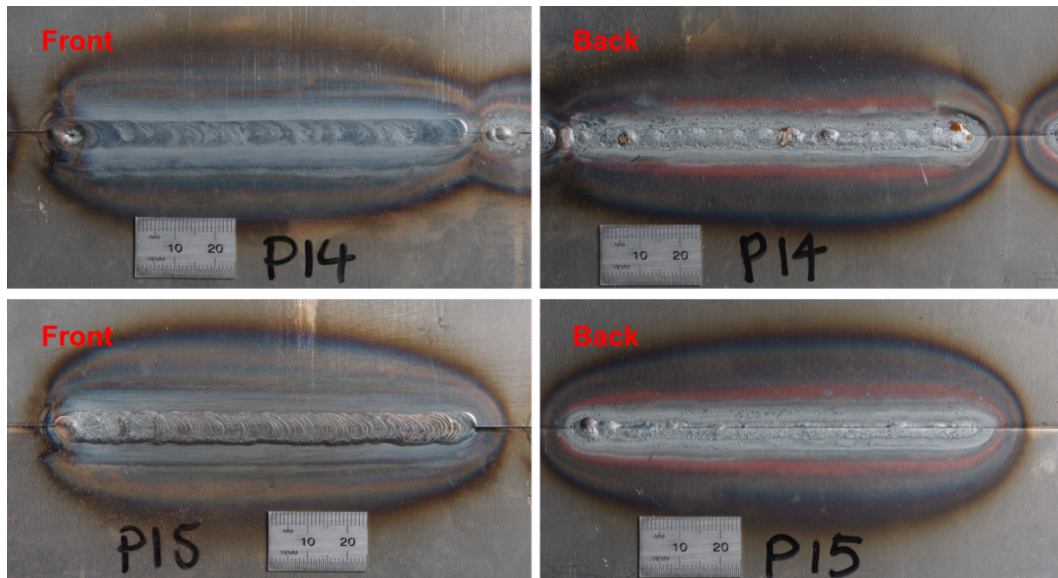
Photographs of the weld pass 14 and 15.
